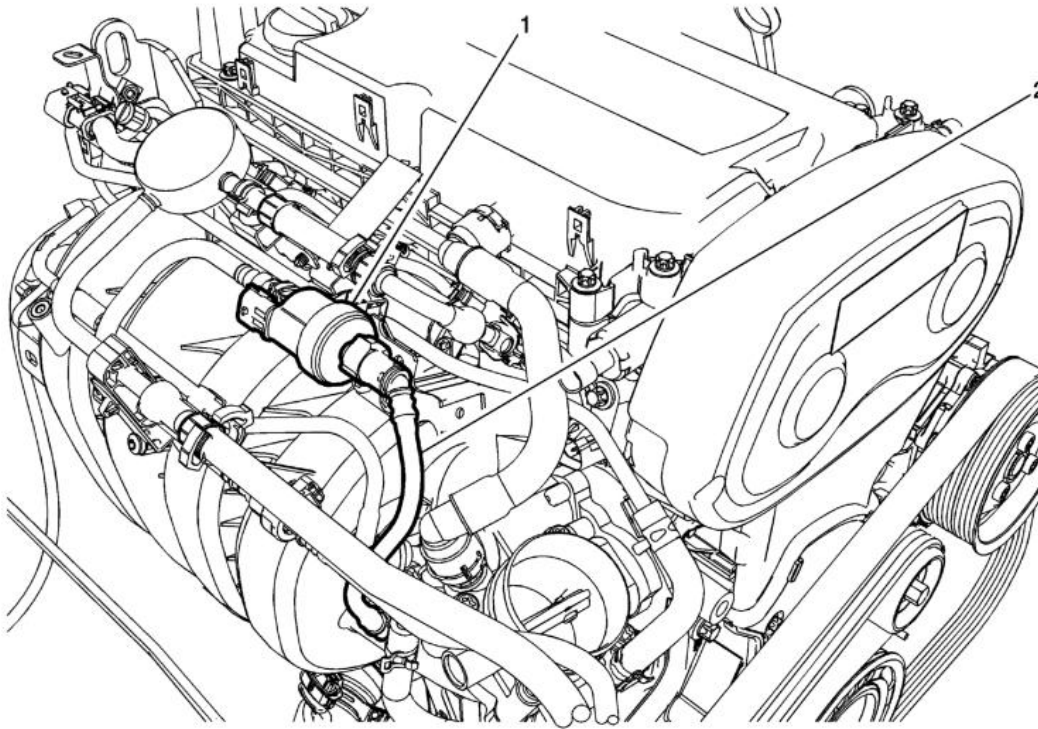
Evaporative Emission Canister Purge Solenoid Valve & Intake Manifold
